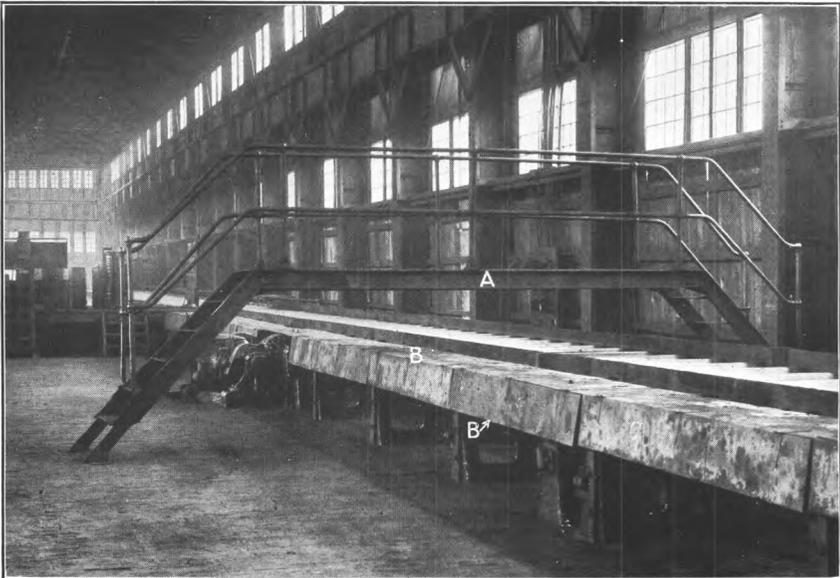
TRANSFER TABLE WITH GUARD FOR GEARS AND WITH BRIDGE.
